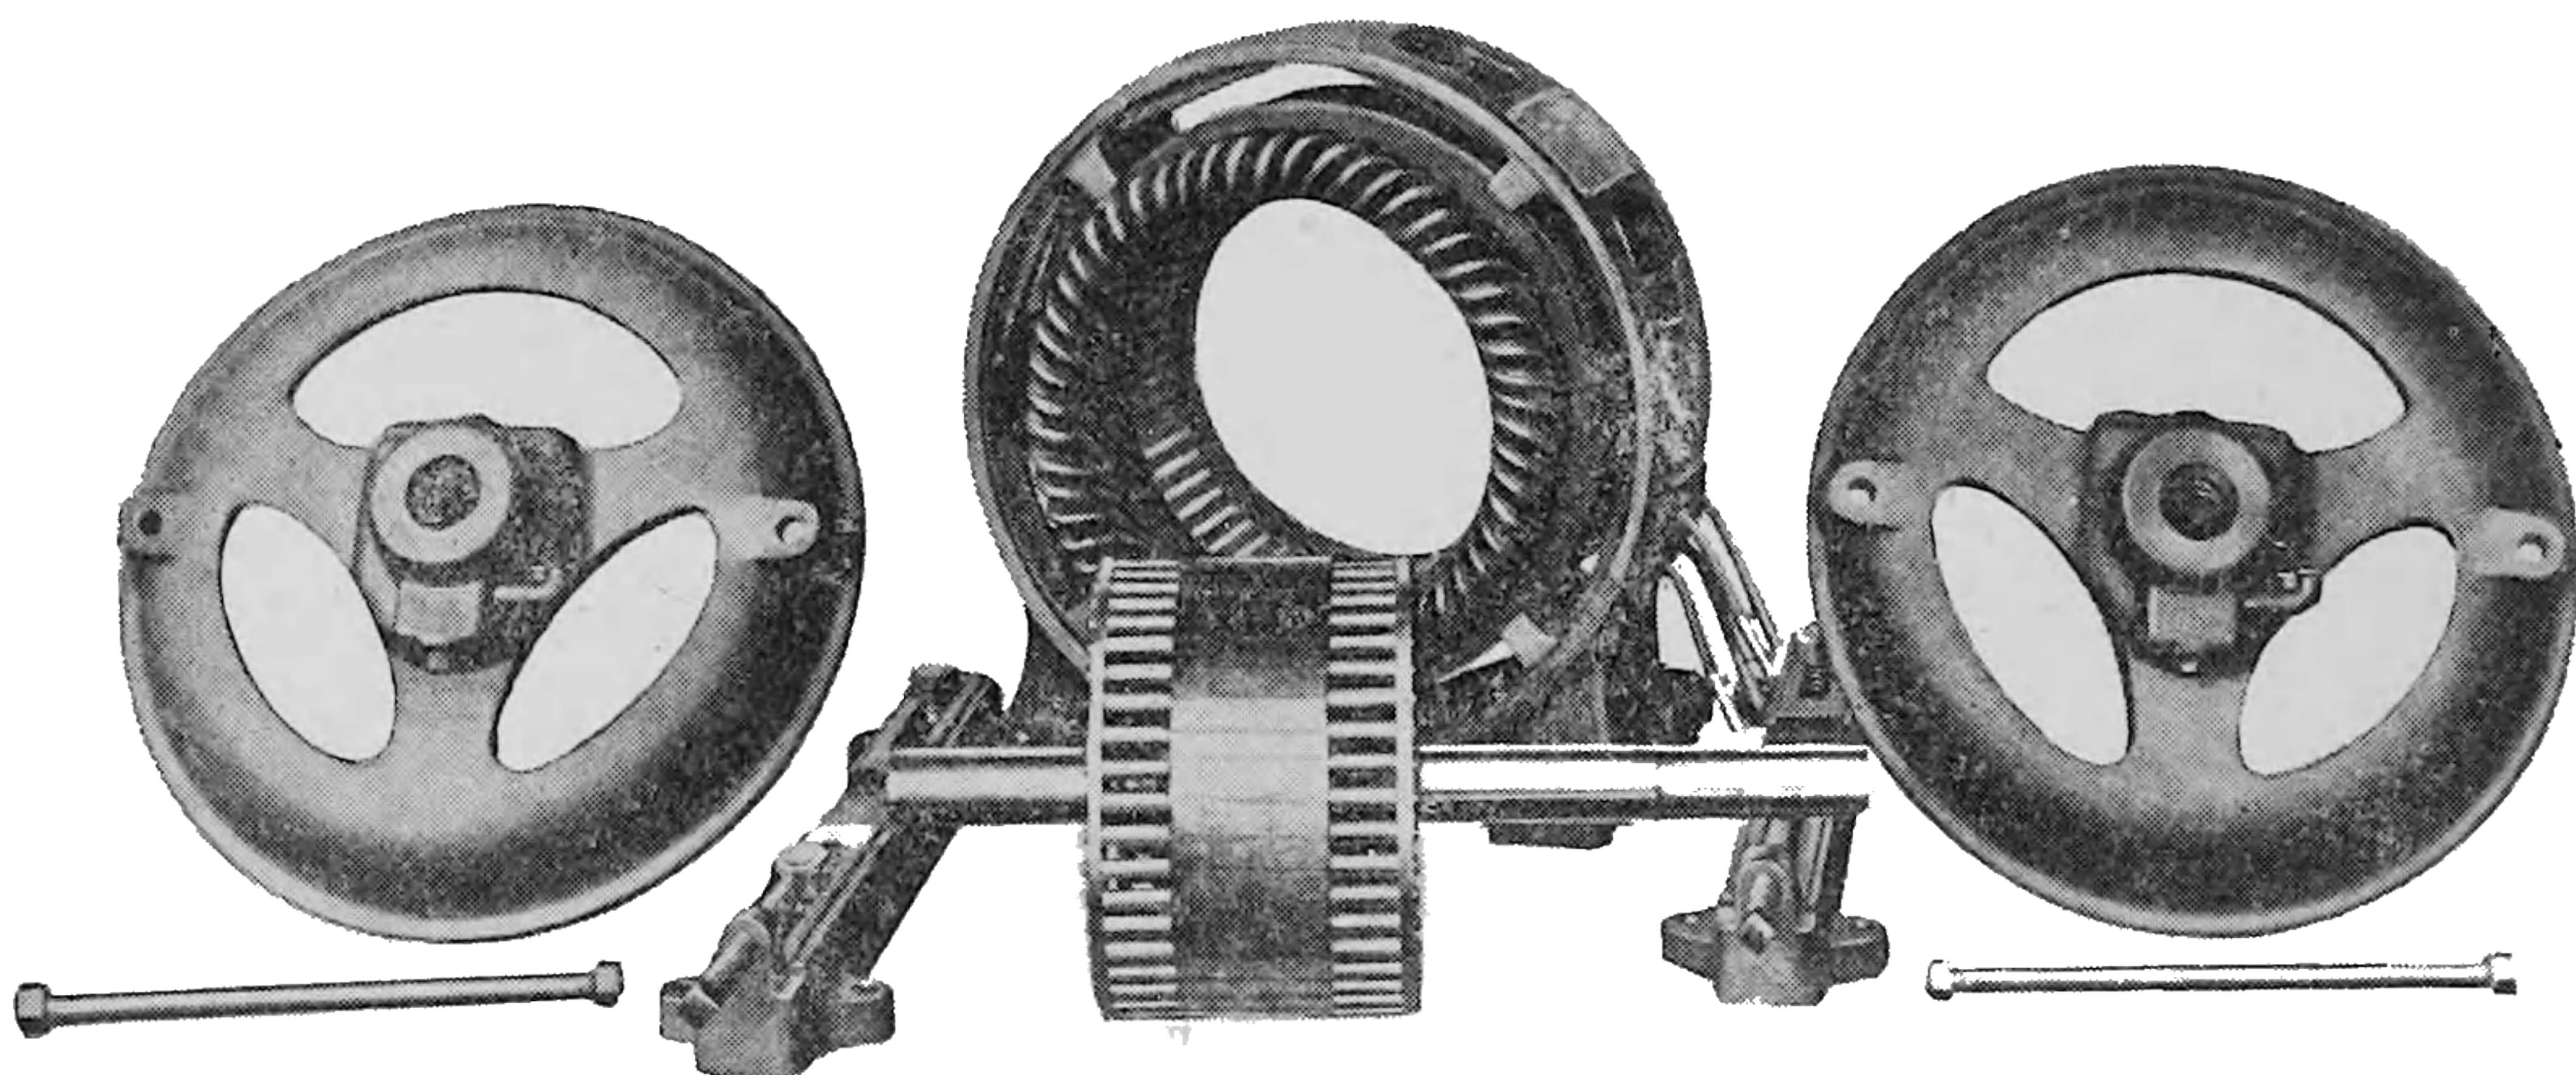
Exploded View of Small AN Allis-Chalmers Motor
